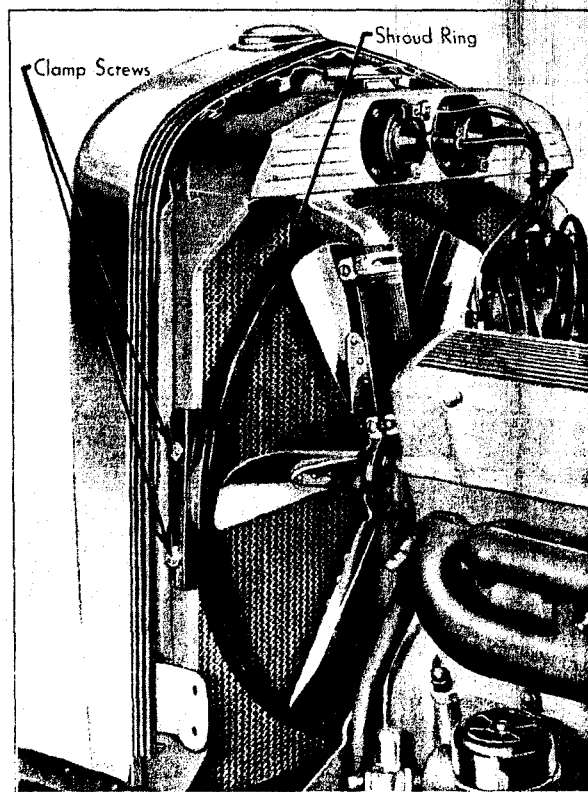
The shroud ring should be raised or lowered whenever the fan belt is adjusted to keep the fan centered in the ring
